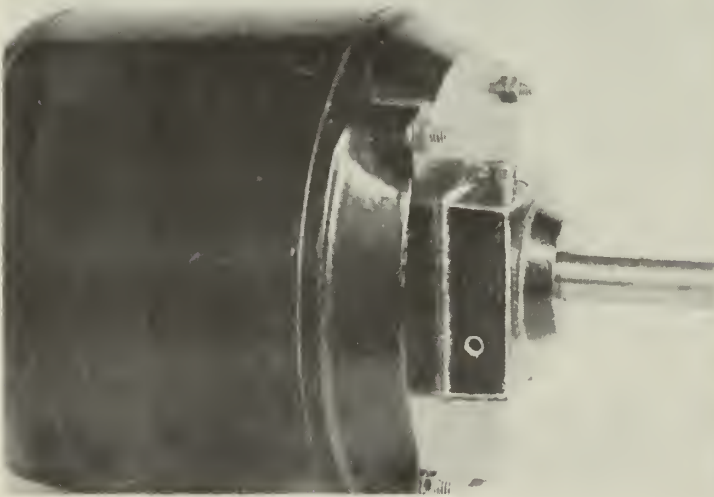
A wool-packed bearing with large oil storage, which should be lubricated once or twice a year. Enough oil should be added to fill the reservoir up to the overflow hole on the side.
